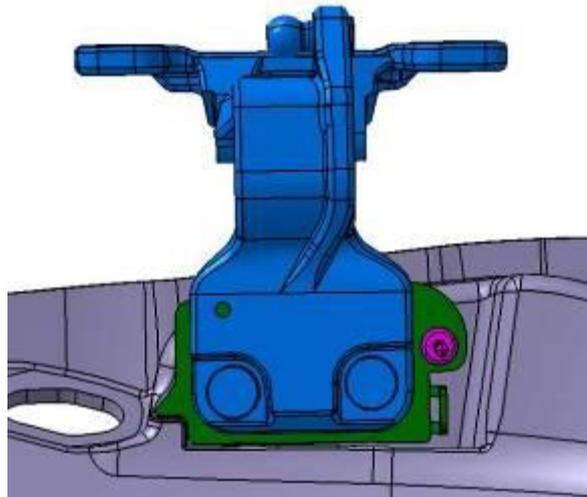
Attachment of the steel hinge to the Mg inner part via an aluminium plate
